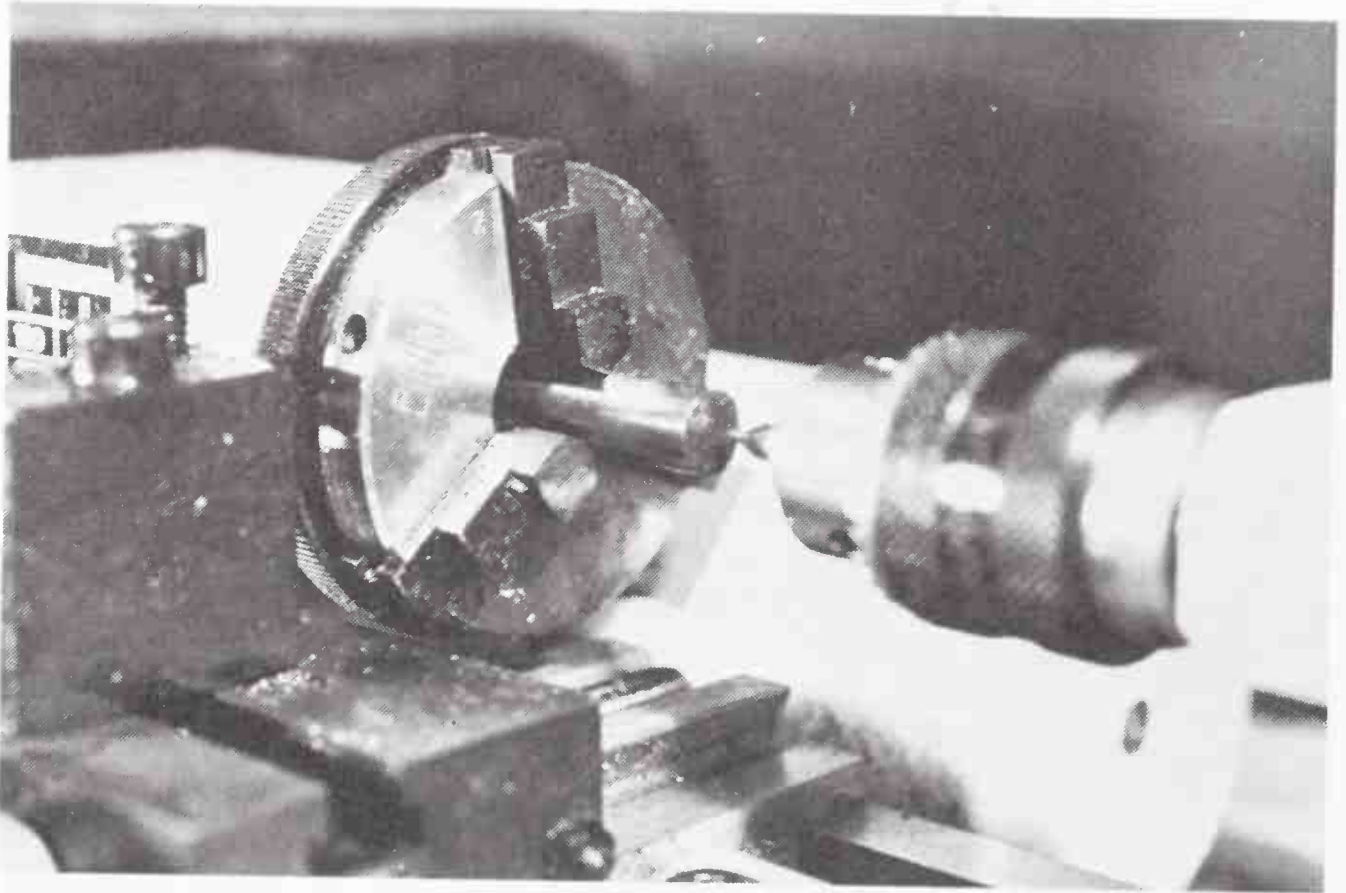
Workpiece in 3-jaw chuck of the Unimat 3 with countersink drill about to mark center.
